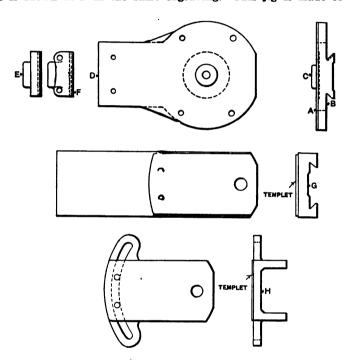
Sheet-iron Templets for Laying out Planer Cross-rail Members
